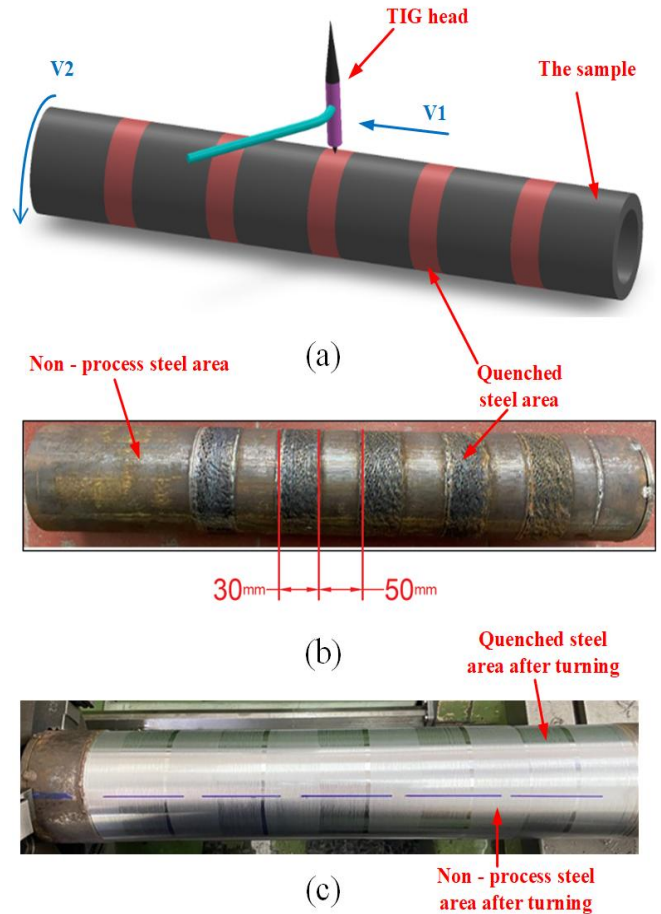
Equipment and process of surface quenching test for S45C steel cylindrical: (a) Surface quenching process, (b) Surface of S45C steel cylindrical after arc quenching and (c) Steel cylindrical after turning the surface layer with a depth of 0.2 mm
